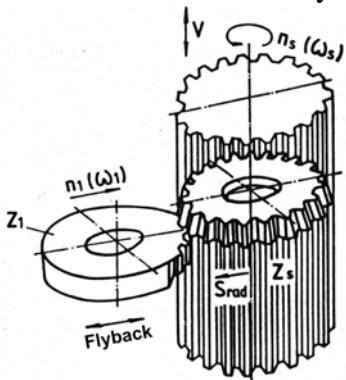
Cylindrical gear wheels' mortising principle using the cutting-wheel
